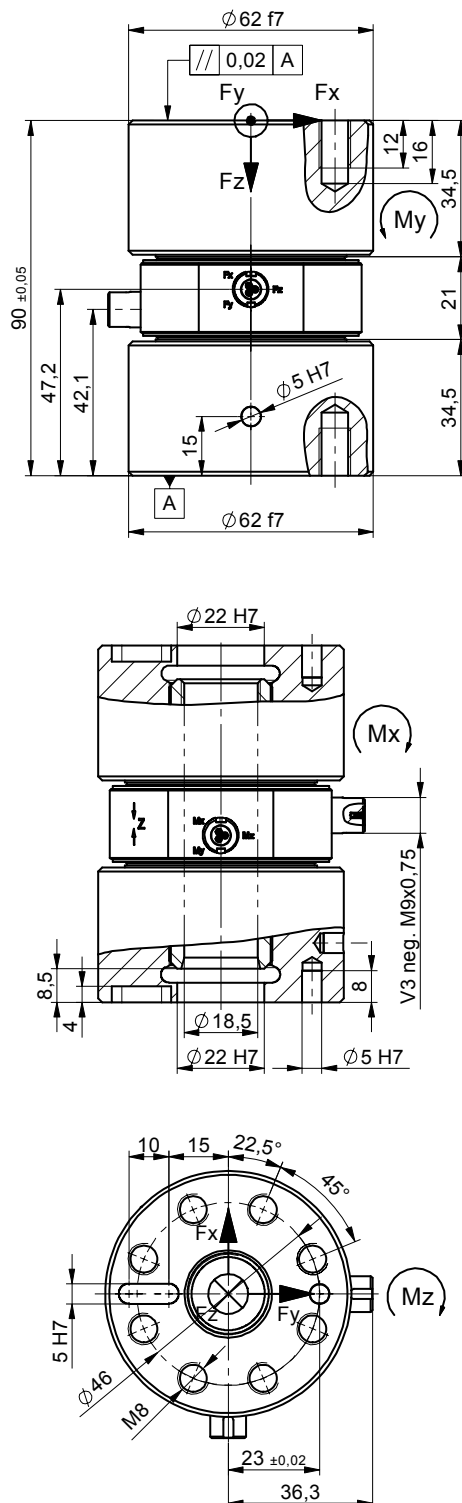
Dimensions of the 6-Axis Force/Moment Sensor Type 9306A
